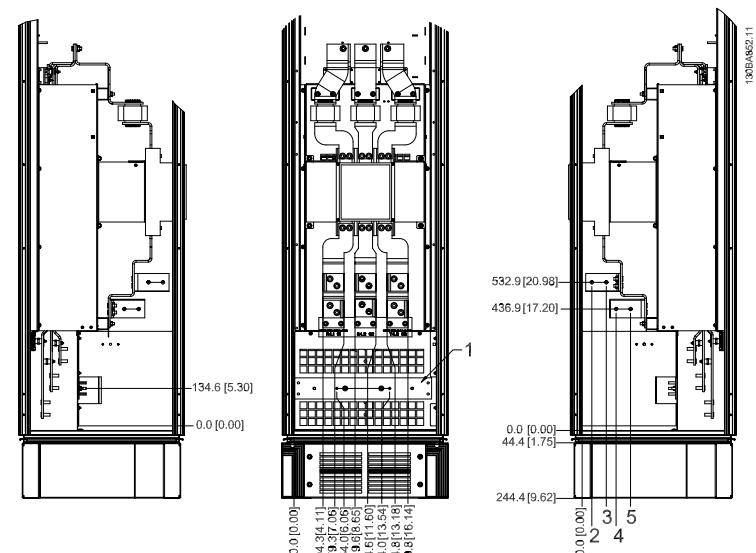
Terminal locations - Options Cabinet with circuit breaker/ molded case switch (Left side, front and right side view). The gland plate is 42 mm below .0 level.
